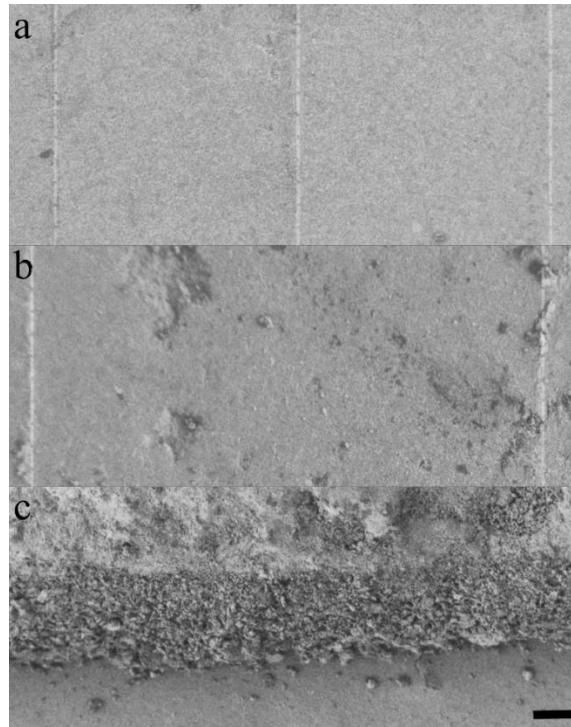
SEM images showing sintered bodies: a) machined with a 1 mm tool, b) machined with a 2 mm tool, and c) edge formation during machining with a 2 mm tool. Dotted lines in (a) and (b) indicate hills formed during machining. Scale bars represent 100 μm , magnification 100x.
